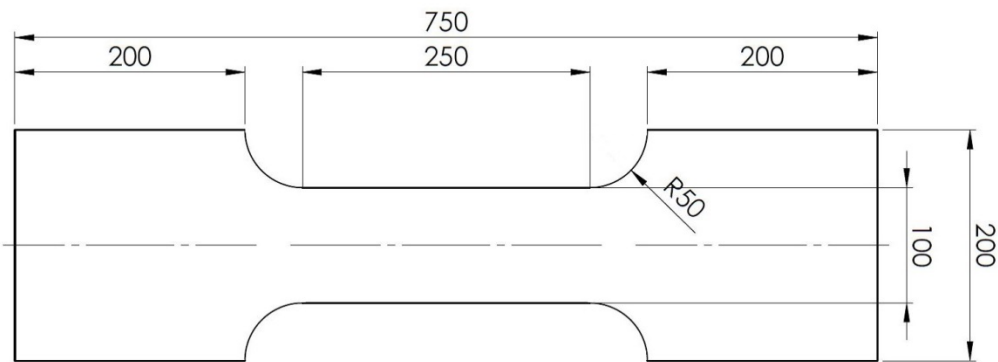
Layout of the test specimen (dimensions in millimeters)
